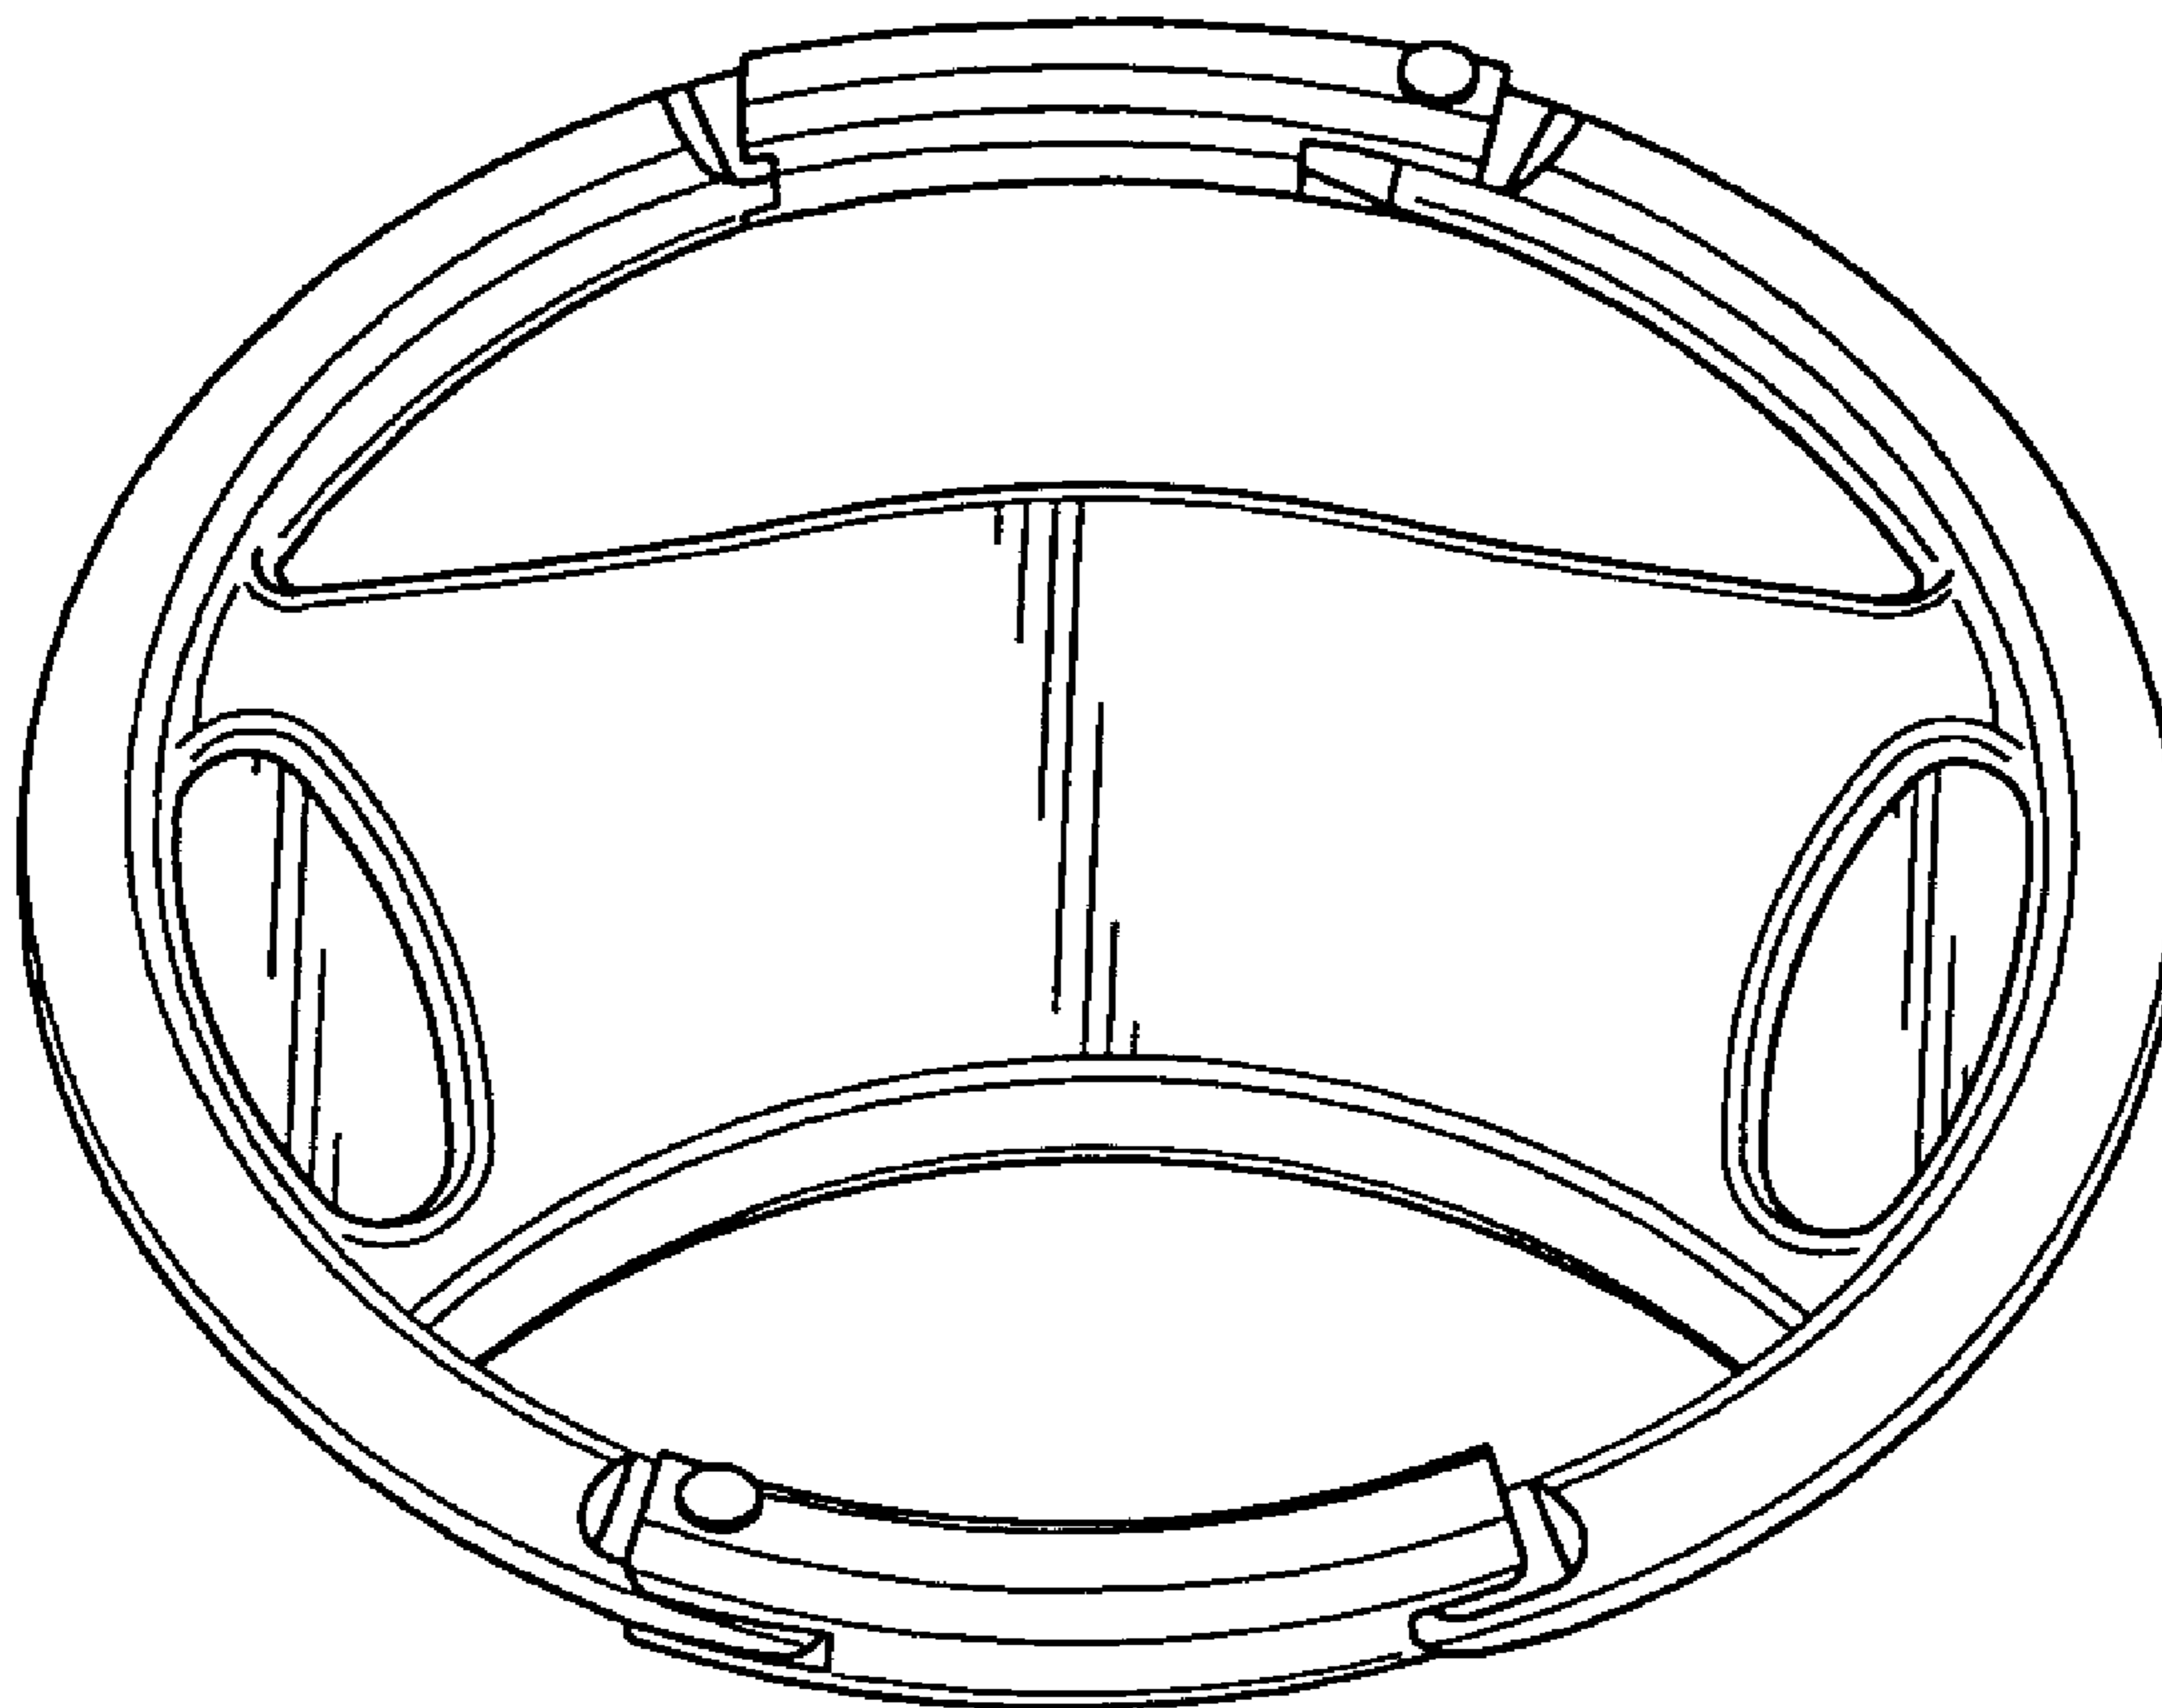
is a perspective view of the steering wheel carabiner showing my new design.
